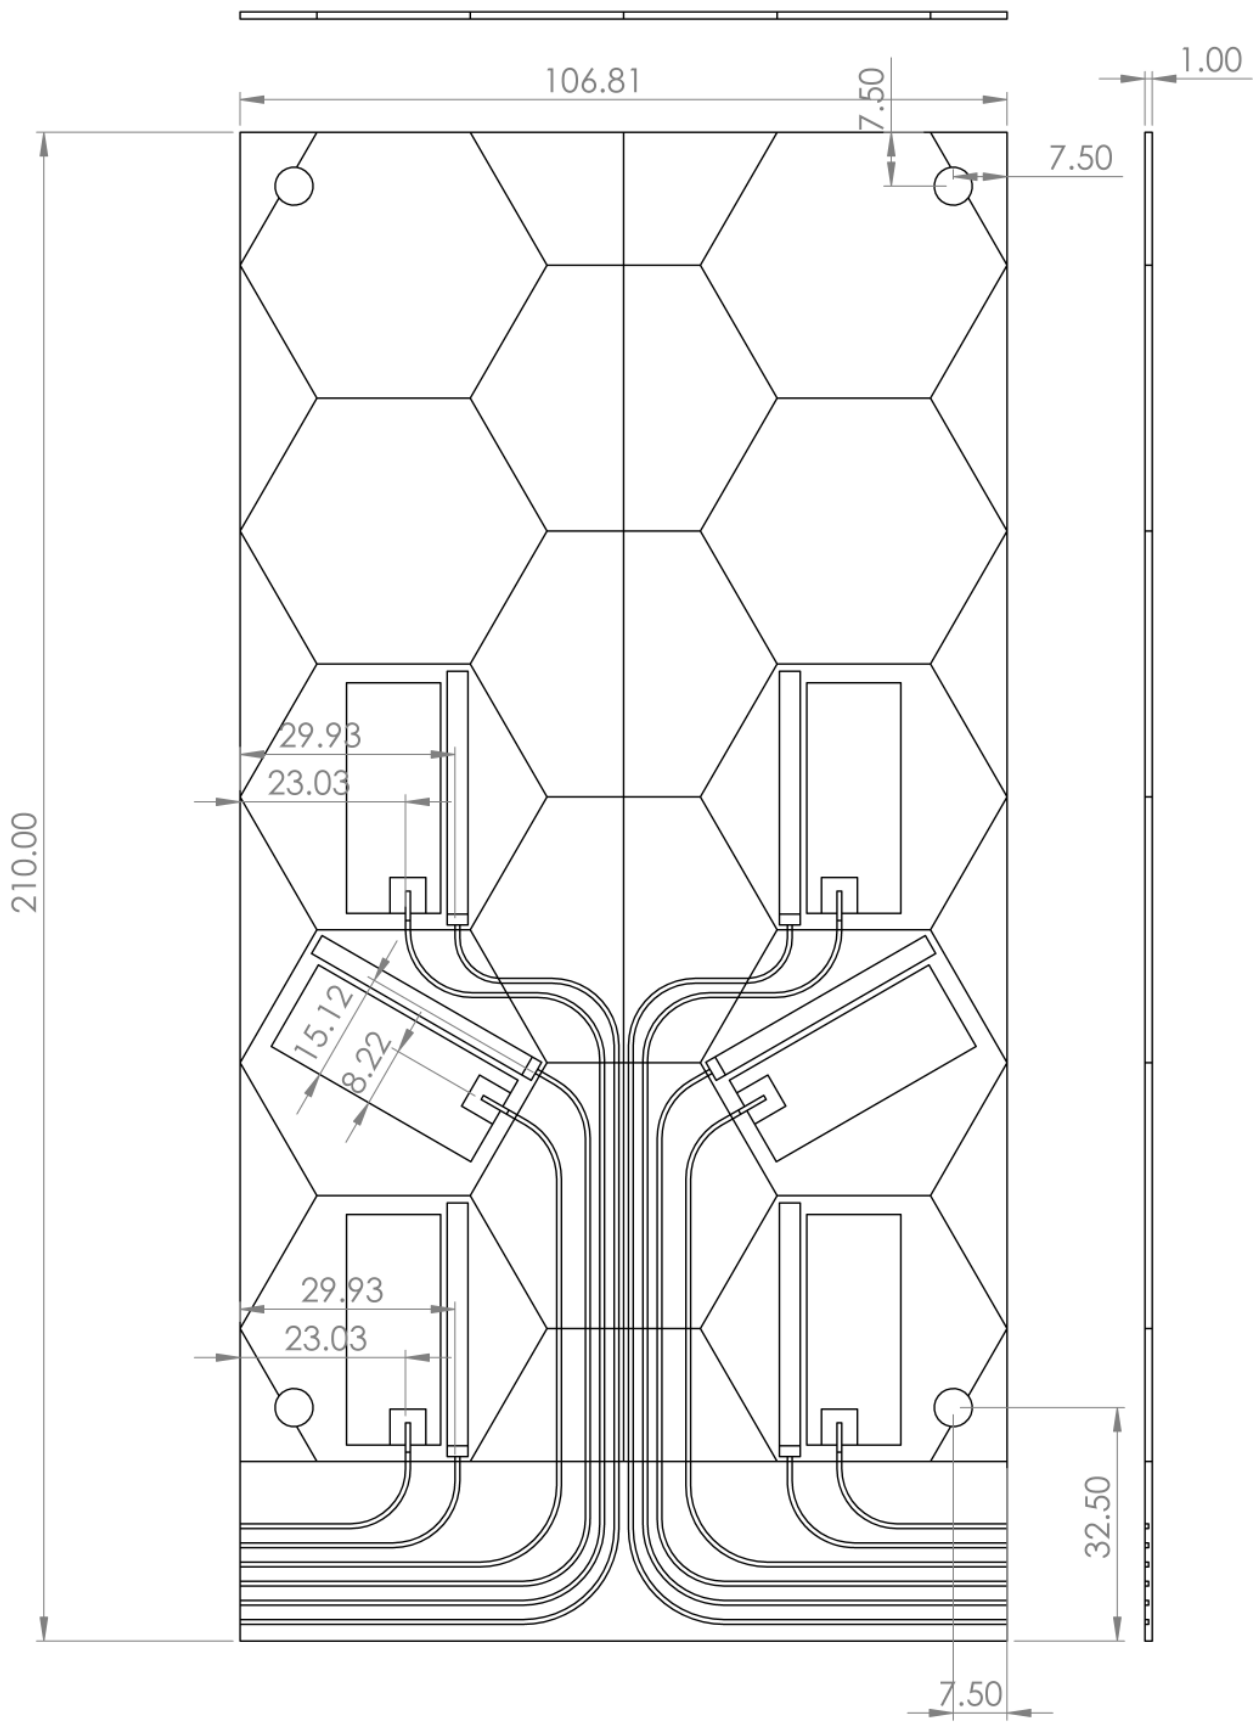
Part drawing for one half the Octo Flexure. This is part B, the part with four round holes near its corners where the round cylinders of Part B fit into, and where the sensing piezo have the wire coming from the sides out of the piezo.
